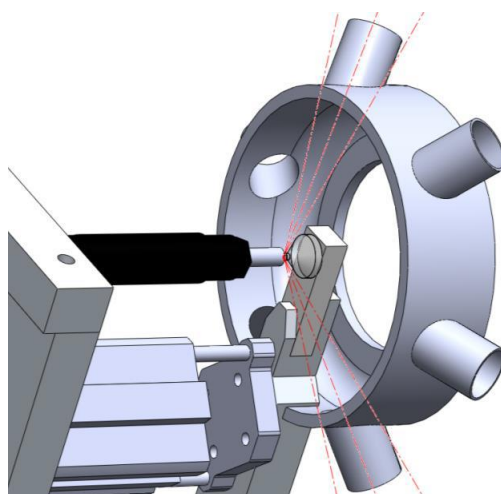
Complete assembly of fuel injection components and fuel exhaust extract<sup>16</sup>.
